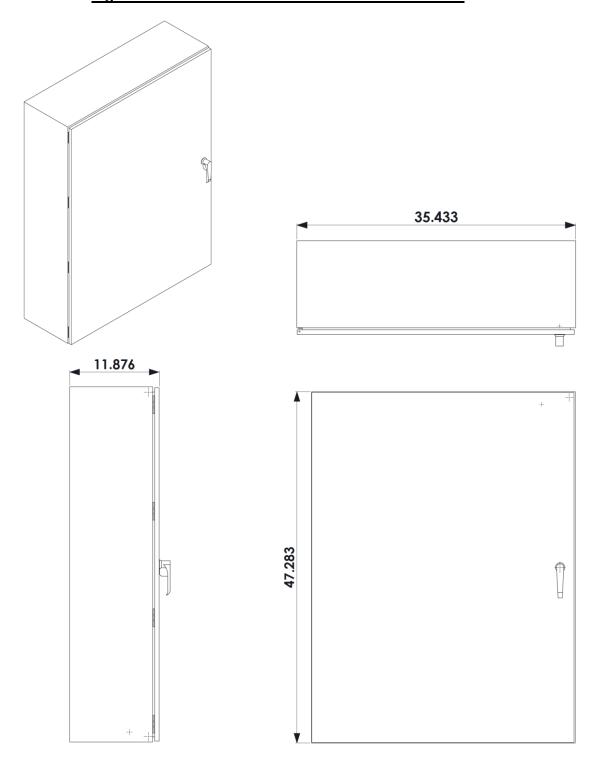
S3534BR E70Cabinet Dimensional Outline
